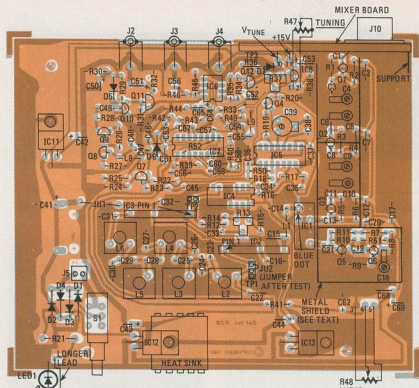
NOTE THAT IC1 AND IC2 are in SIP (Single in-line Package) packages. Pin-1 end is on left when package is viewed from side with markings.
